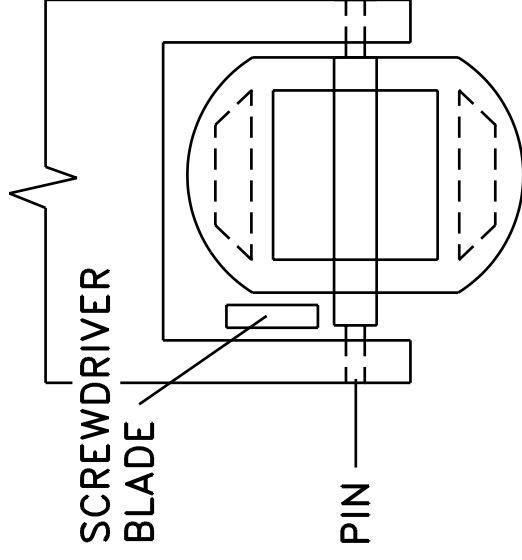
REMOVAL OF PADDLEWHEEL PIN
